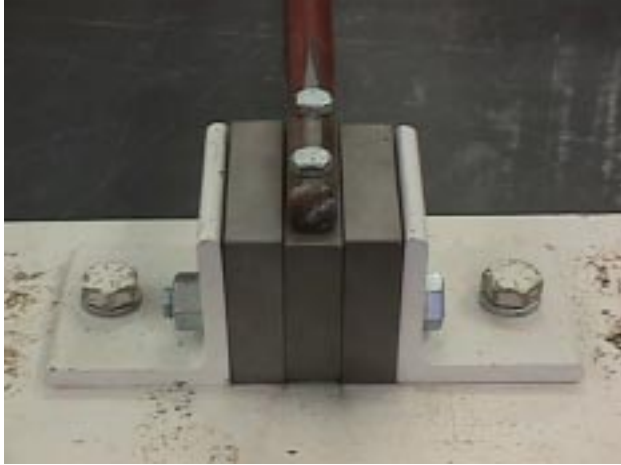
The three tool steel pieces are clamped between two pieces of 2 inch steel angle using the 5/8 inch pivot bolt. This view is from the back of the shear. The handle is bolted to the top of the middle tool steel piece.
